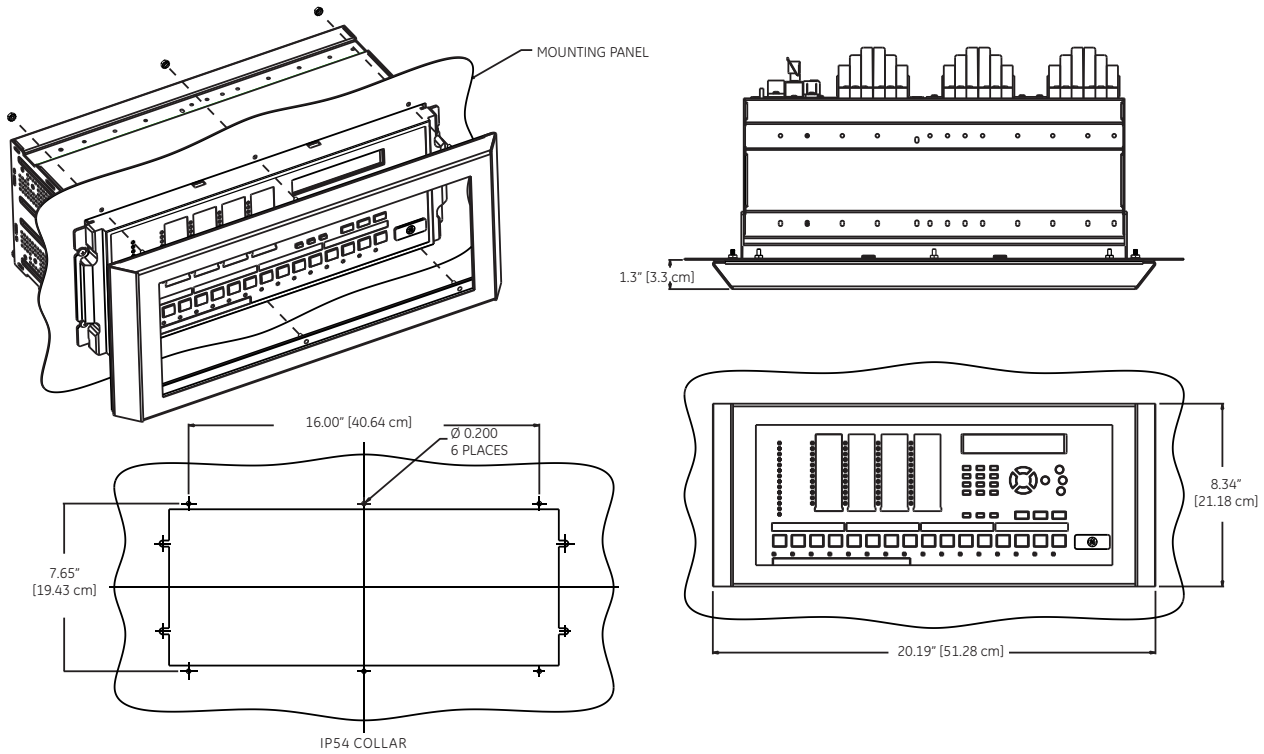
Horizontal dimensions (IP54 mounting collar)
